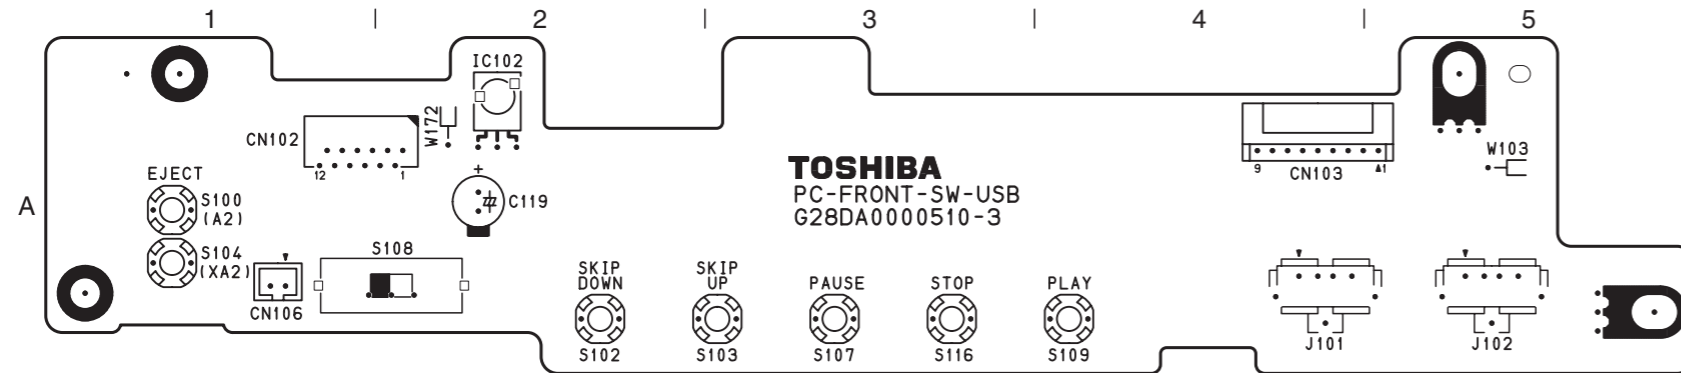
Front Switch/USB PC Board (Top side)
